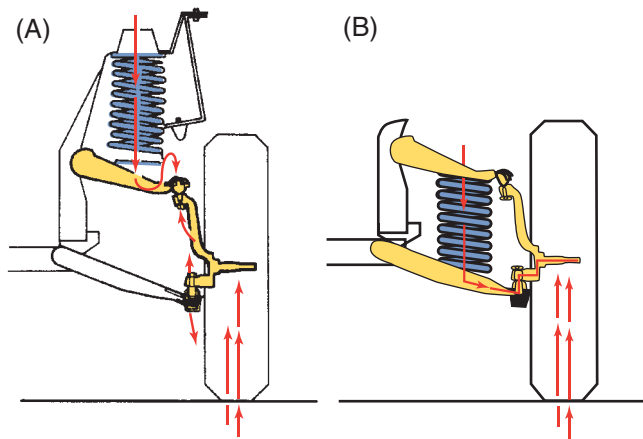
(A) The upper ball joint is the load-carrying joint. (B) The lower ball joint is the load-carrying joint in this system.
